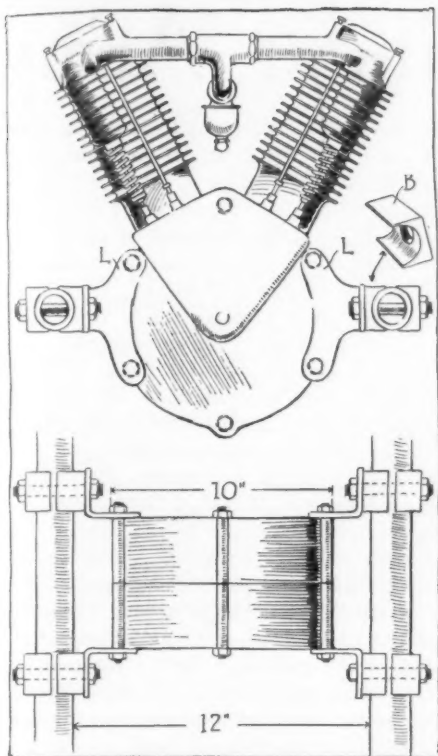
METHOD OF HANGING MOTOR ON CYCLE CAR
